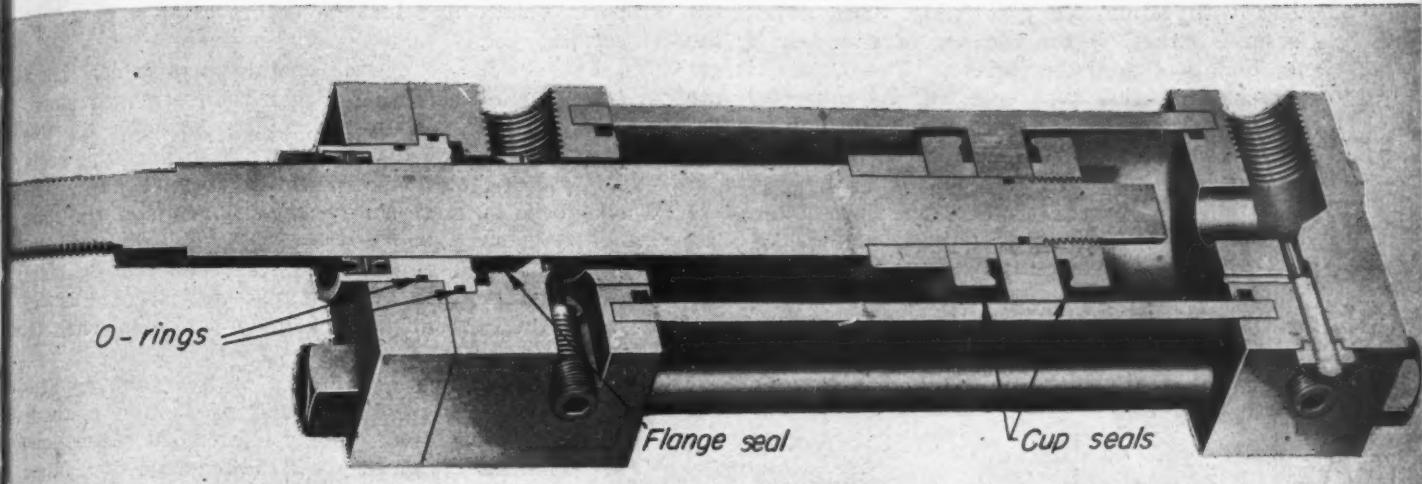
Cylinder using cup seals, shown in cutaway. These seals hold pressure and provide cooler operation
